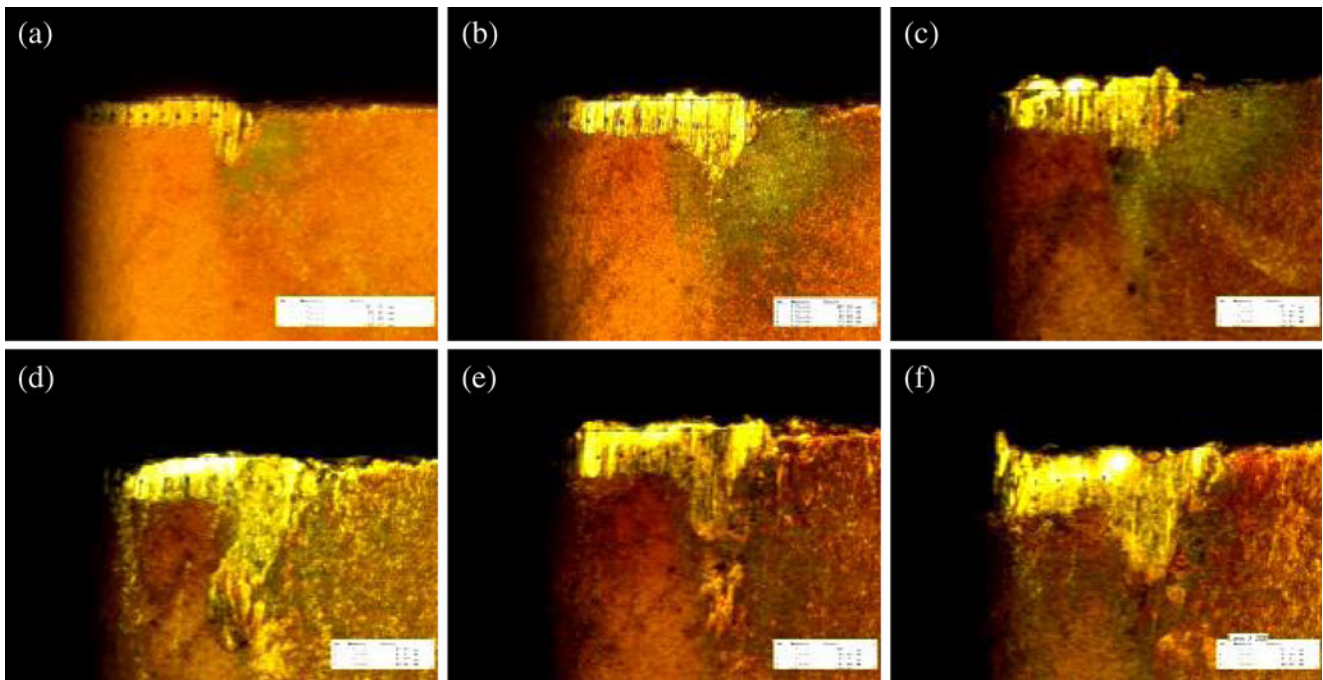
SEM photographs of flank faces of YBC251 coating cemented carbide tool. a 5, b 10, c 15 min
